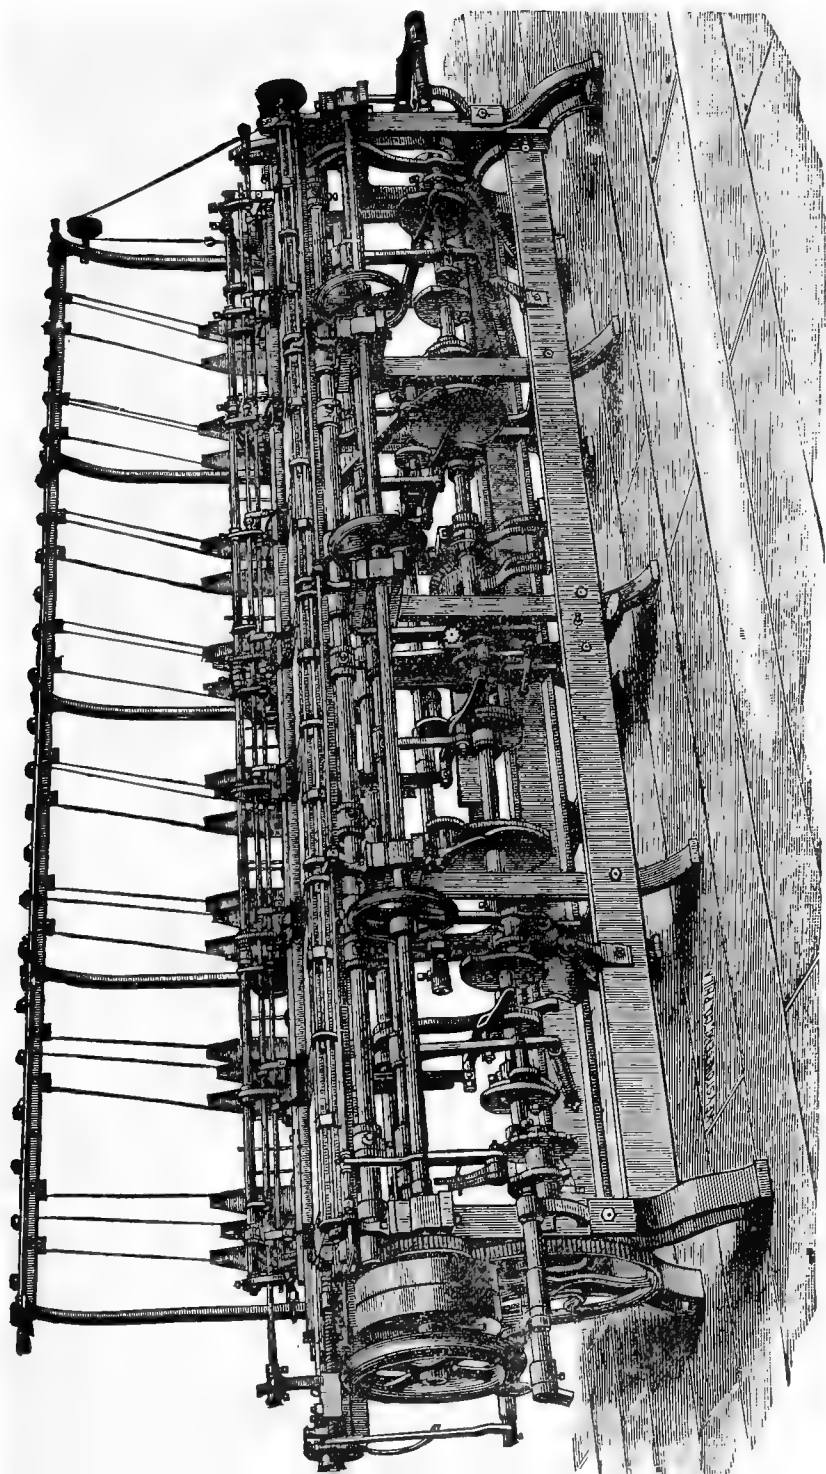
The Joseph Heginbotham Machine Company knitting machine.
